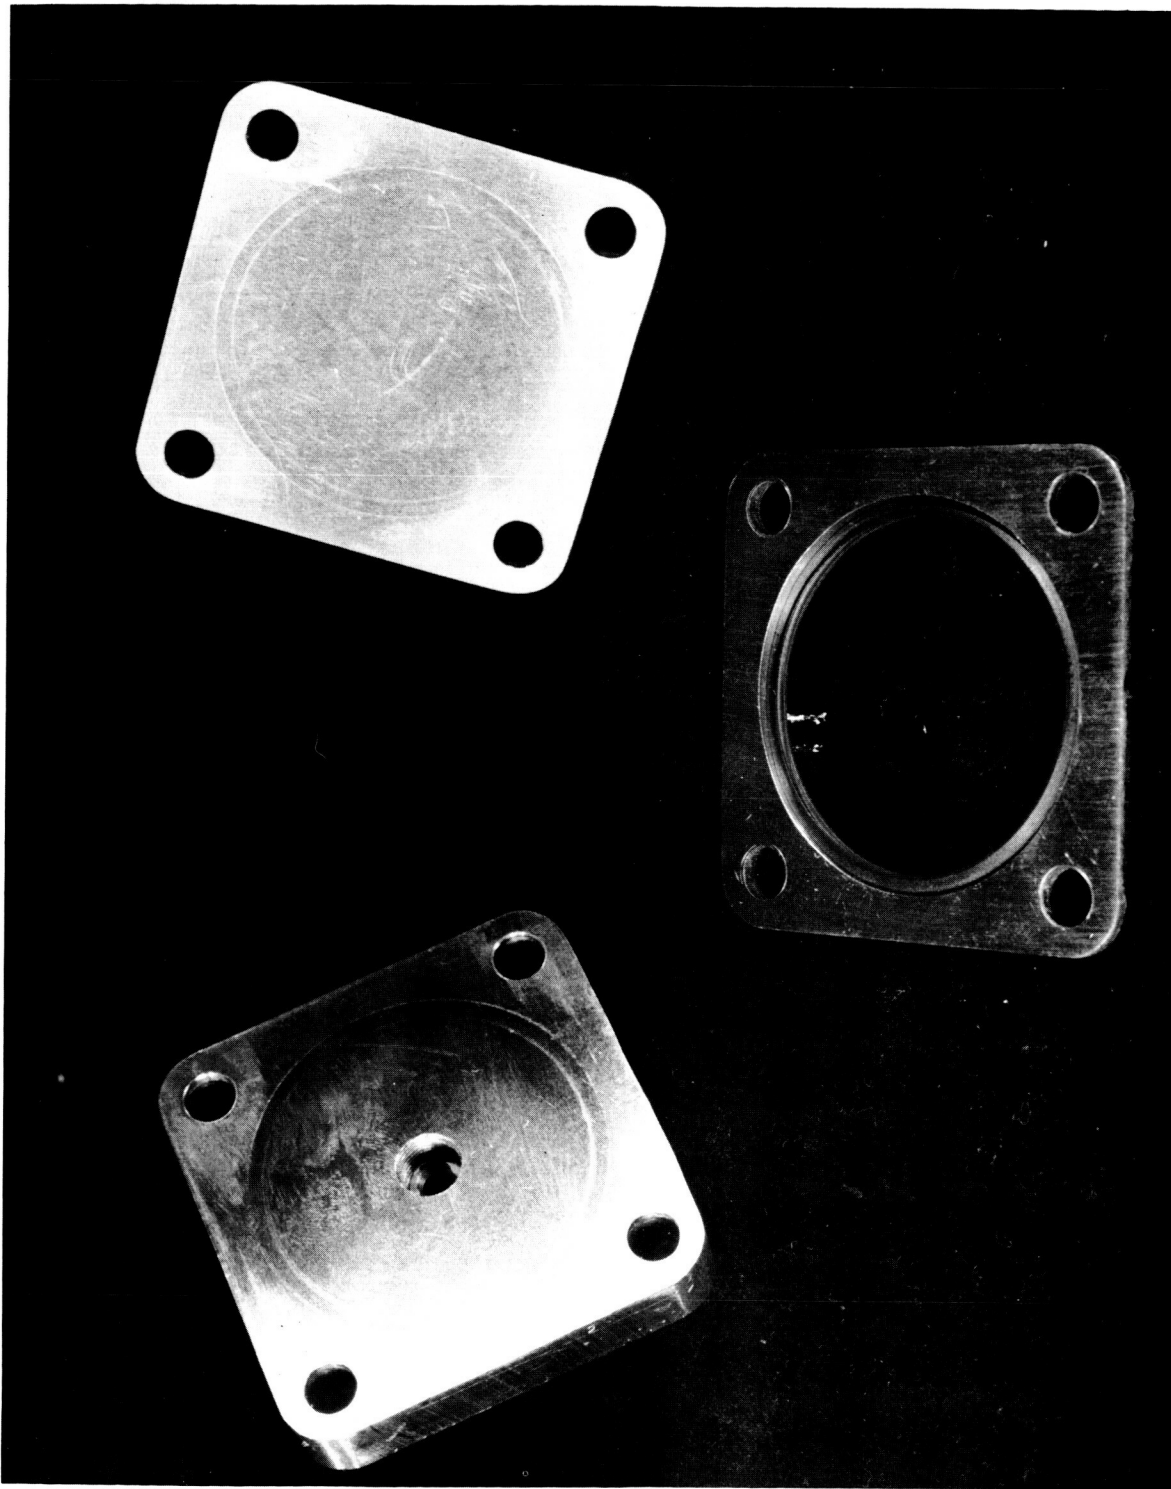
Parker "V" Section Metal Seal and Test Fixture
